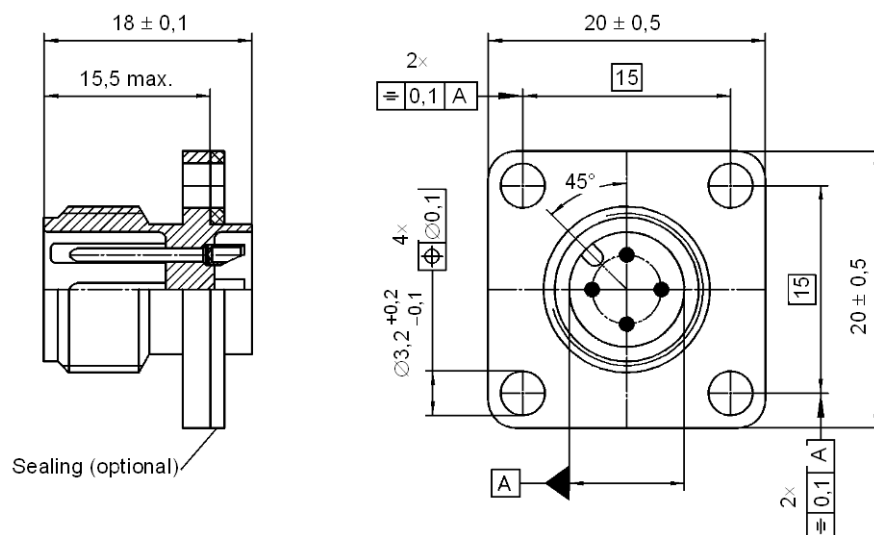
Fixed connector, male contacts, mounting with thread M12 × 1, square flange front mounting
